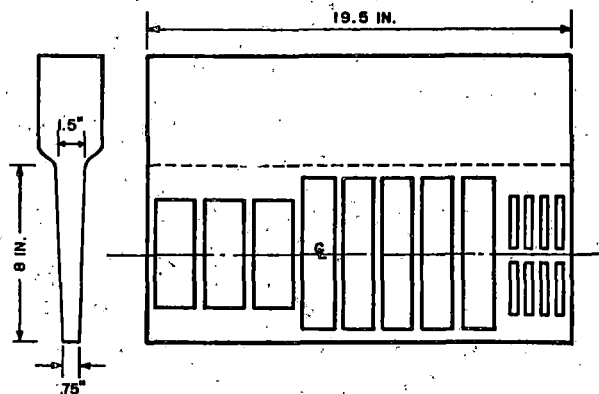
TAPERED PLATE CASTING FOR TEST SAMPLES
